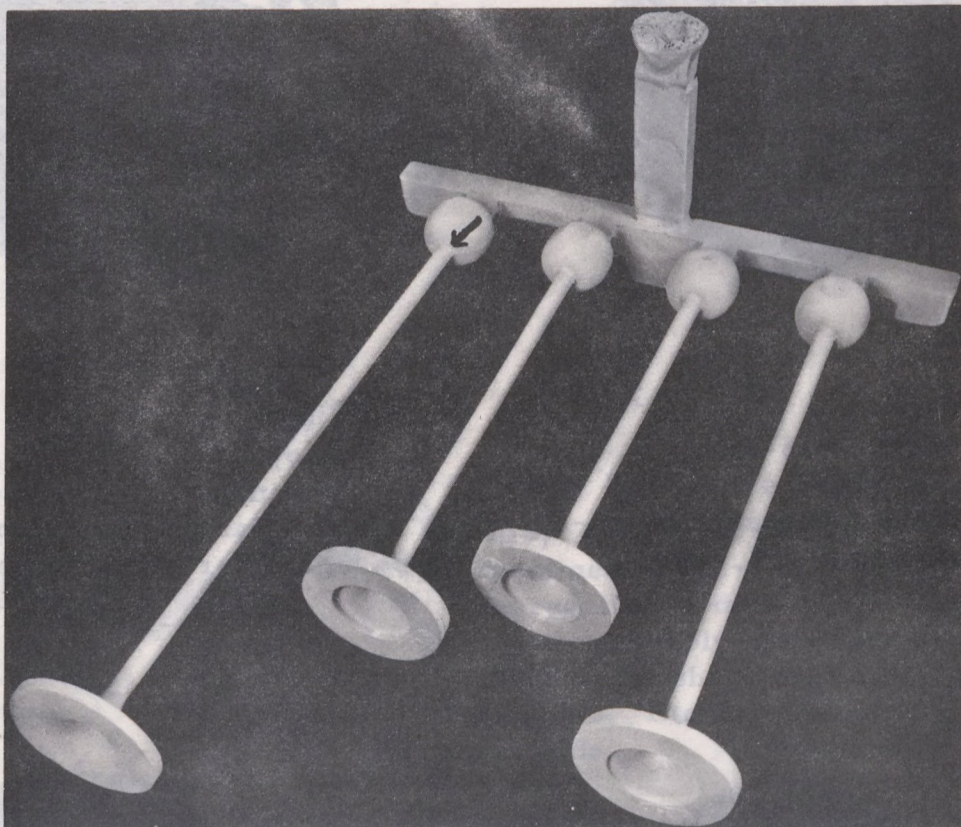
Hot-tear Casting. Note crack at the ball-bar junction in 18-in. bar.
